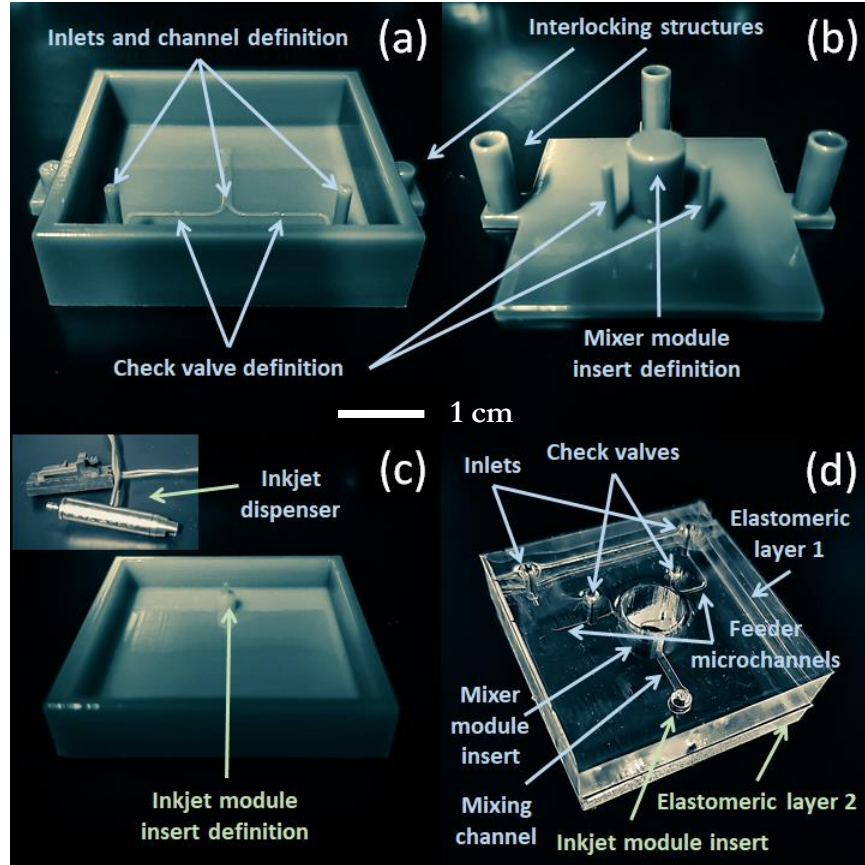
(a) Bottom half of the two-part interlocking 3D printed mold for casting elastomeric layer 1 comprising structural definitions for the fluid inlets and the microfluidic channels. (b) Top half of the two-part interlocking 3D printed mold for casting elastomeric layer 1 comprising structural definitions for the check valves and the mixer module insert. (c) 3D printed mold for casting elastomeric layer 2 comprising structural definition for the inkjet module insert (inkjet module shown in the inset). (d) Plasma bonded casts of elastomeric layers 1 and 2 forming the bilayer combinatorial print head (CPH).
